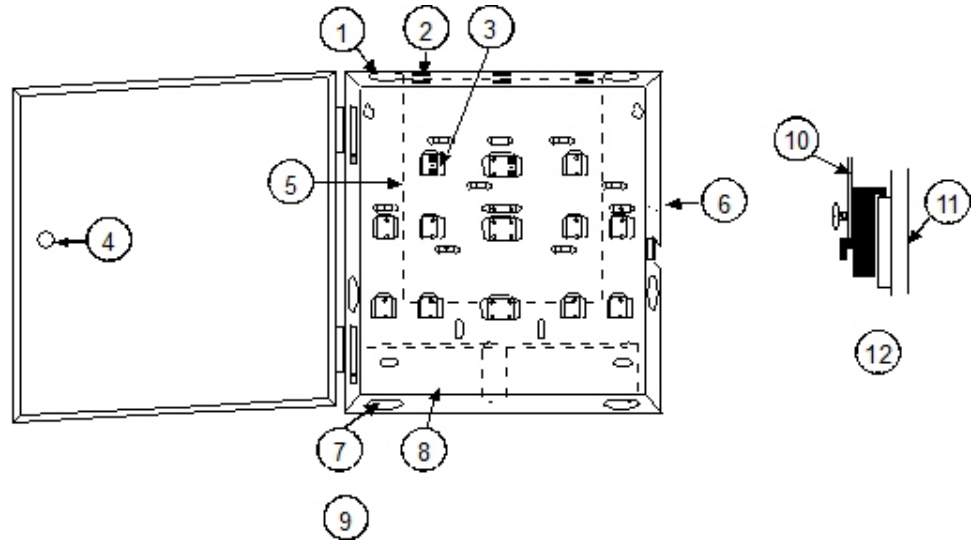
Mounting the EA120 to the AE1 Enclosure
